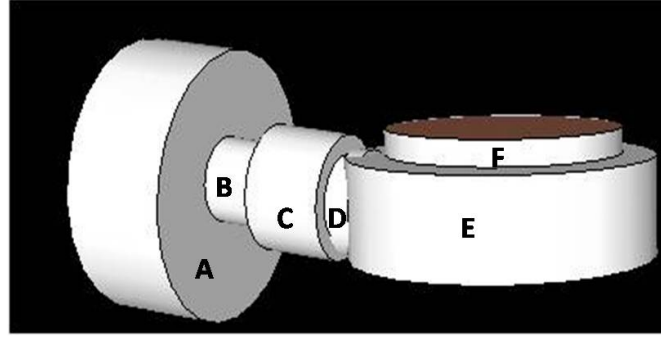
The piezomotor mirror assembly. A: Piezomotor, B: Piezomotor shaft, C: Coupler, D: Shaft of mirror assembly, E: Mirror holder, F: Mirror.
